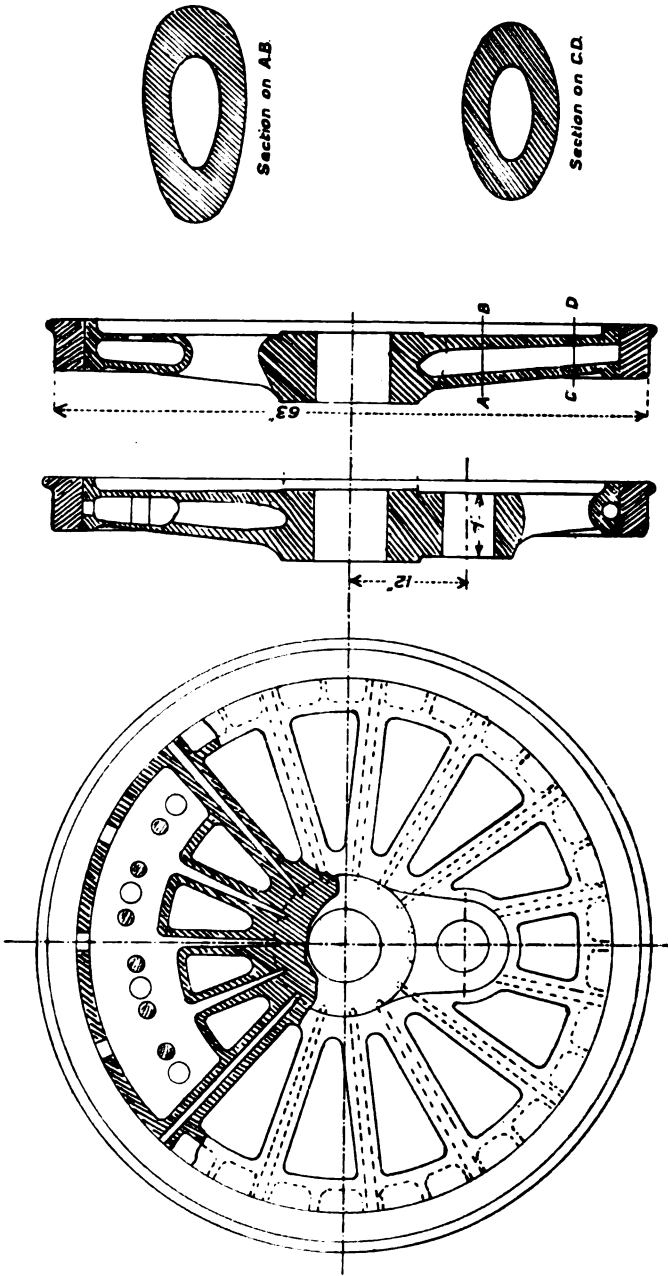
Driving Wheel, with Cast-iron Centre.
